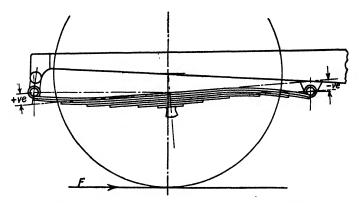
DEFLECTION OF FRONT SPRING DURING BRAKING
